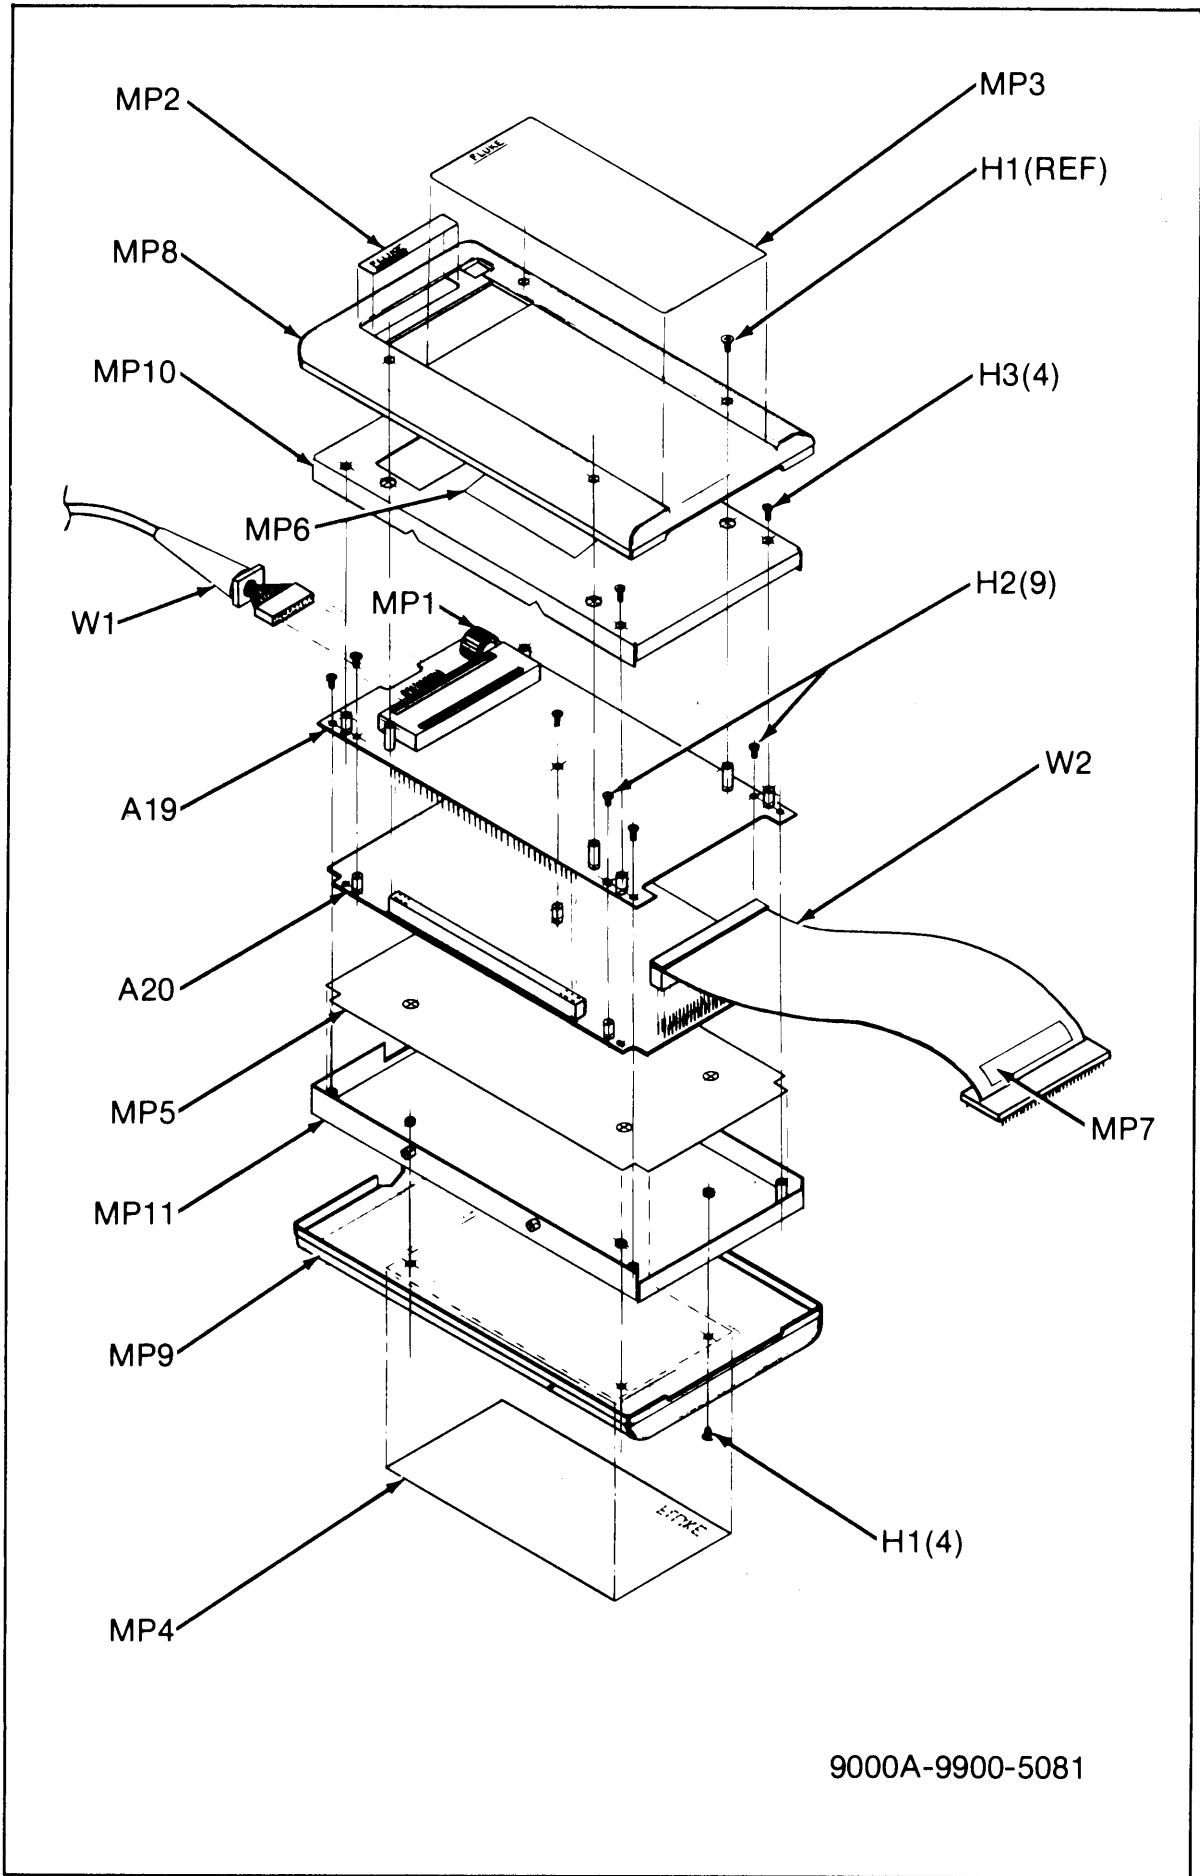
9000A-9900 Interface Pod Final Assembly
